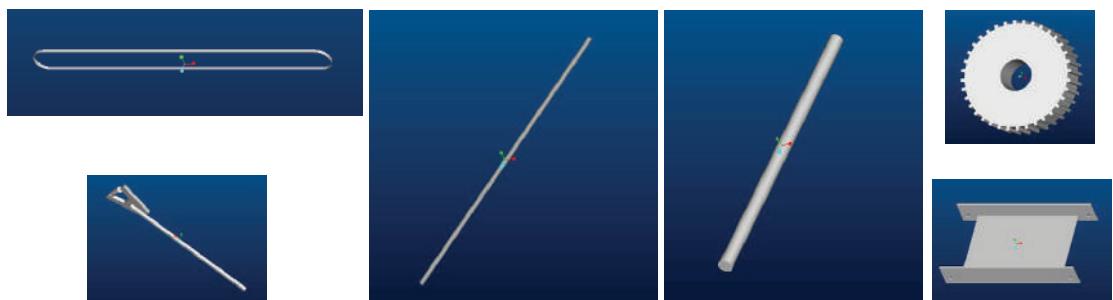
CAD modeling of the various components (belt, gear, picker arm, base, push bar, and gear drive bar) of the final design concept for the automatic music page turner example.
